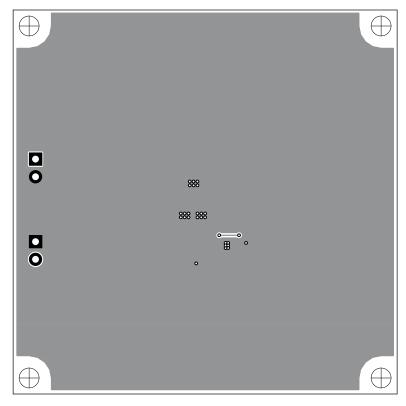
TPS54260_GSM4p2V Bottom-side Layout
